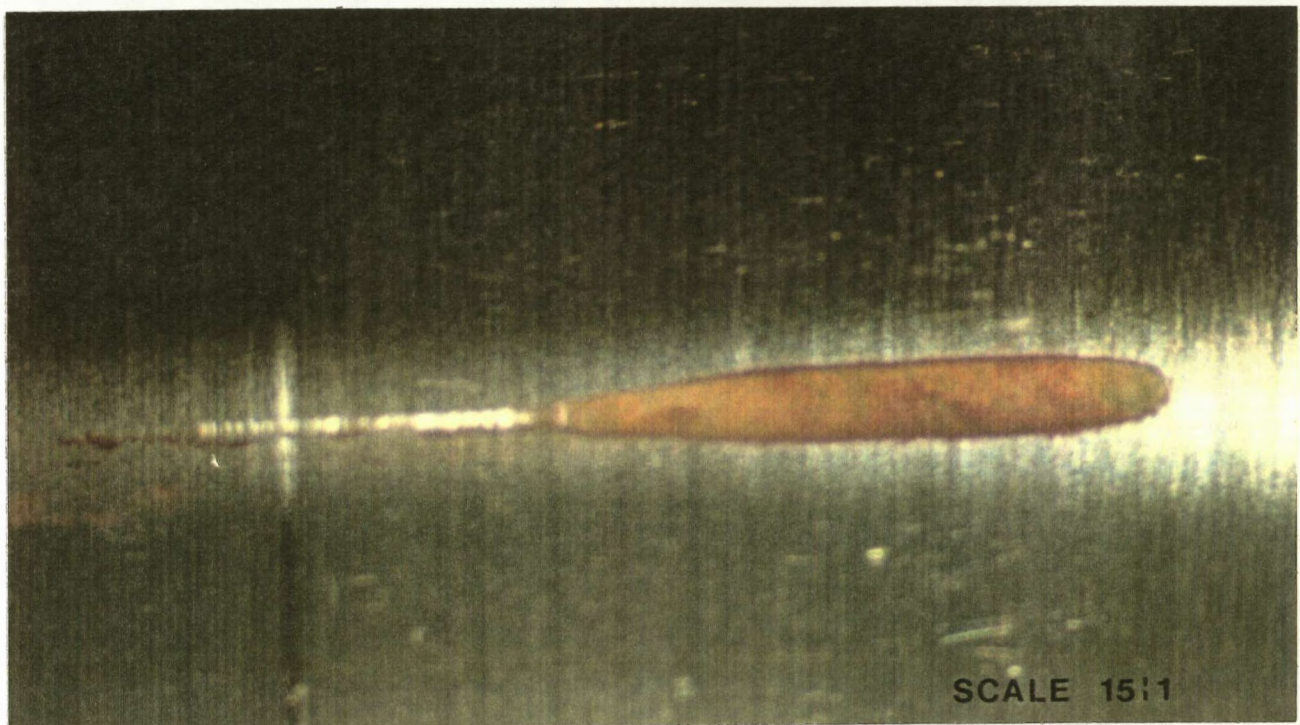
Oxidised debris deposits in flute of roller bearing.
